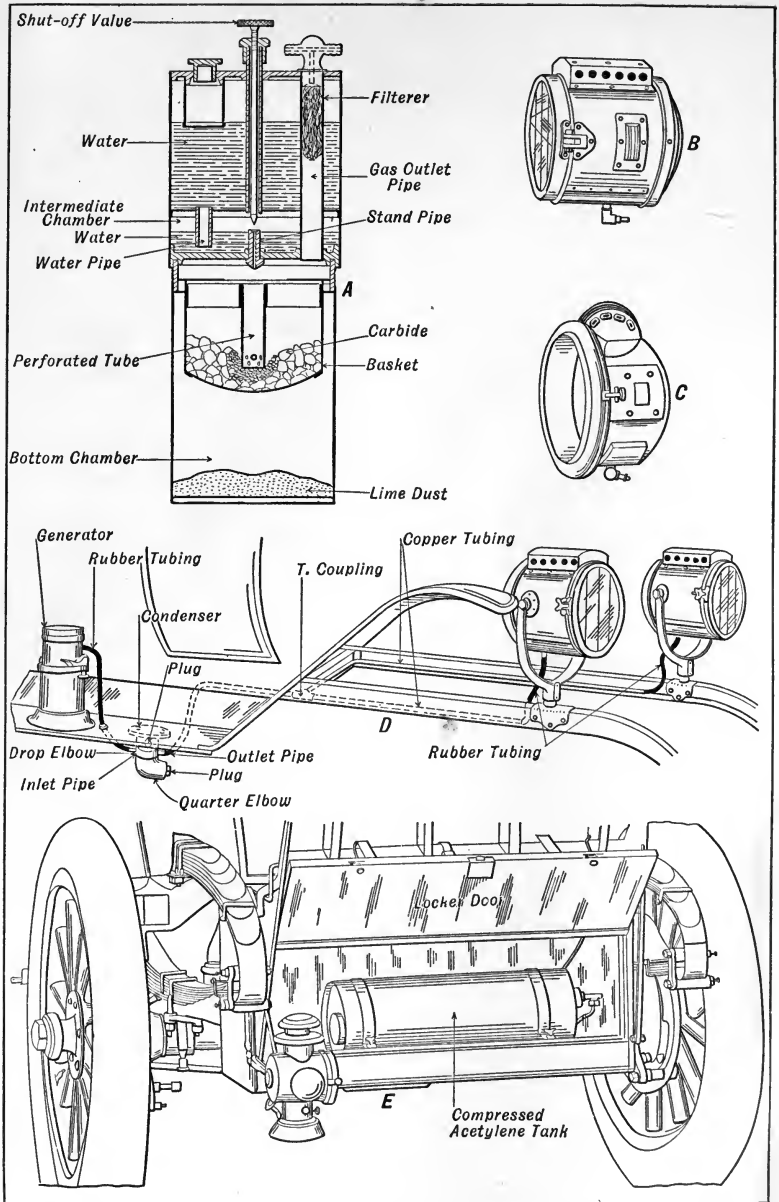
Gas Generators and Lamps Used in Connection with Acetylene Head-light Installation.
